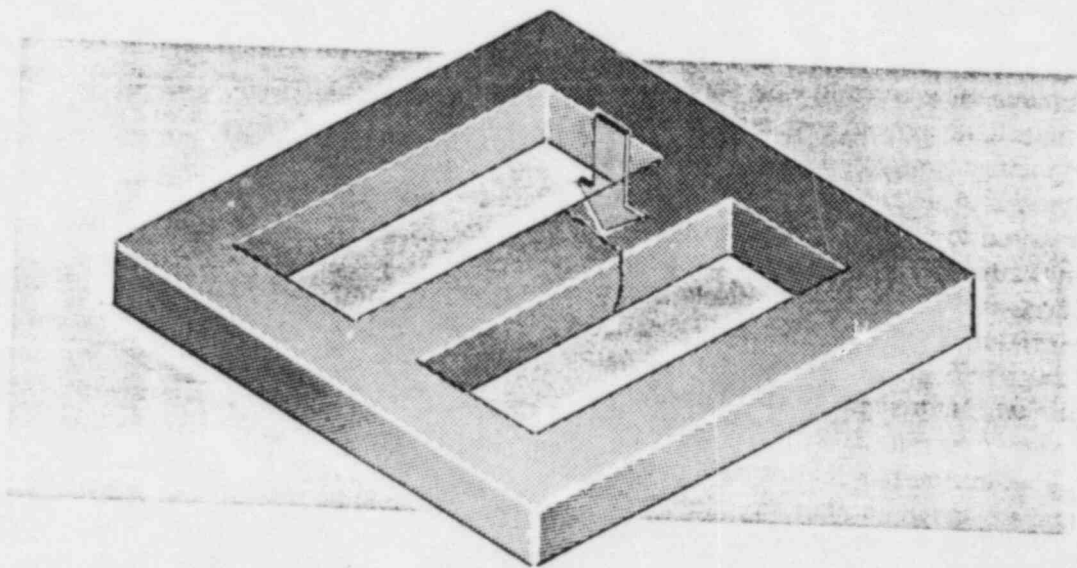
Welding the frame in this confined portion will cause the frame to crack.
